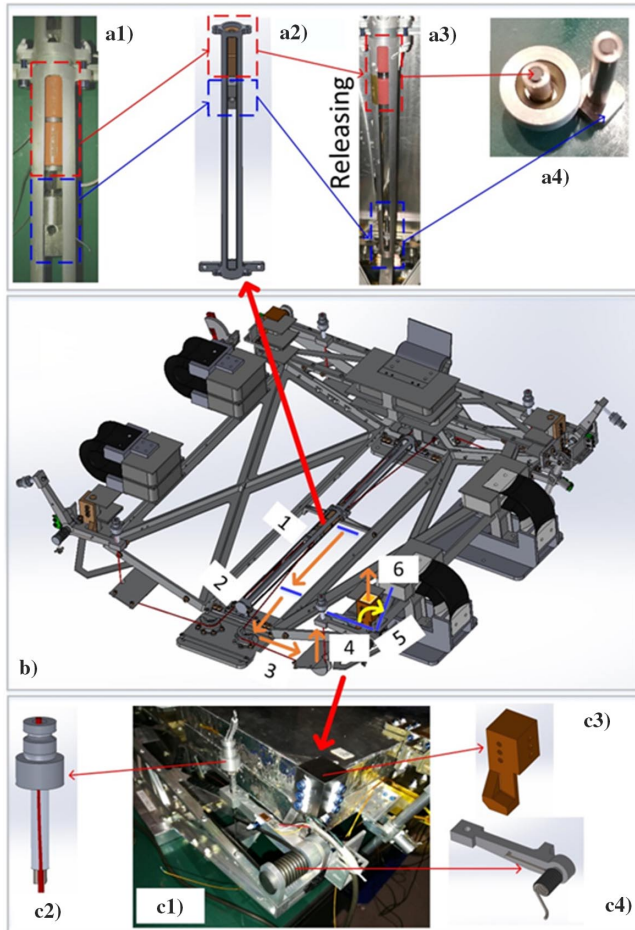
SMA-based releasing and pretensioning mechanism: a1)–a4) SMA expander physical objects; b) SMA expander mounted at center of bottom of support plate and releasing processes 1–6; c1)–c4) pretensioning and pressing mechanism.
